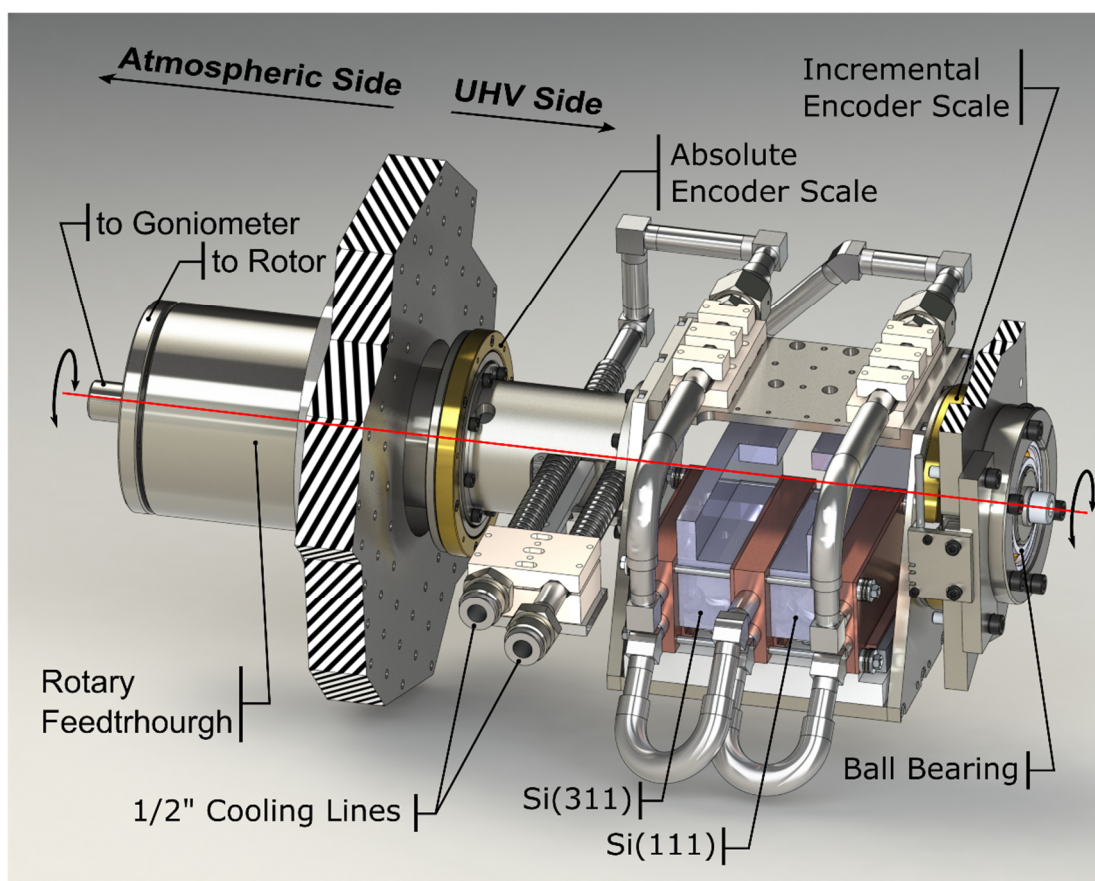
Drawing of the in-vacuum crystal stage. The flat front flange of the monochromator vacuum chamber is broken to allow a view onto the atmospheric part of the rotary feedthrough. Cut faces are shaded black and white.
